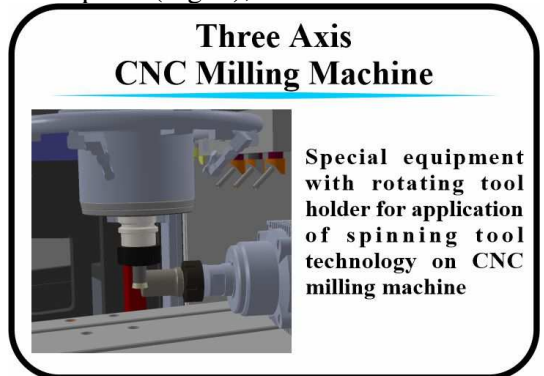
Milling machine equipped with additional spindle for rotating simultaneously the cutting tool and workpiece
